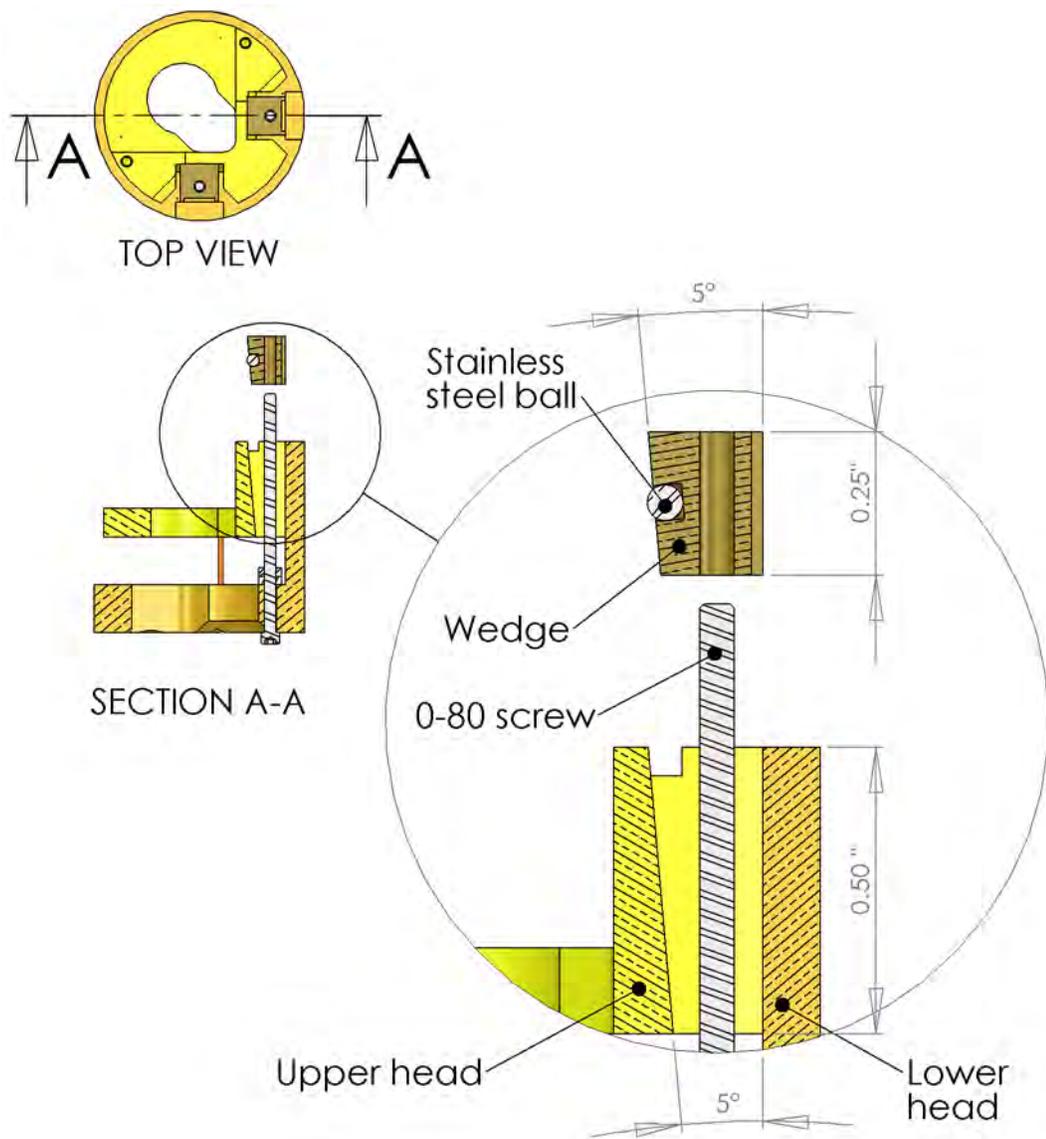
Technical drawings of the coarse positioning mechanism. (above) Top view and section of the head assembly, including wedges. (below) Detail view of section. A vertical face on the lower head opposes a near vertical face on the upper head. The 5° offset of these faces matches the offset between the corresponding wedge faces. When the wedge is moved down between these two faces, it forces the translation of the upper head with respect to the lower head. The direction of movement created by each wedge is at right angles to each other, thus allowing for positioning in xy plane. A press fit stainless steel ball serves to reduce the contact area between the wedge and upper head, reducing the likelihood that the coarse positioning system will freeze in place at low temperature.
